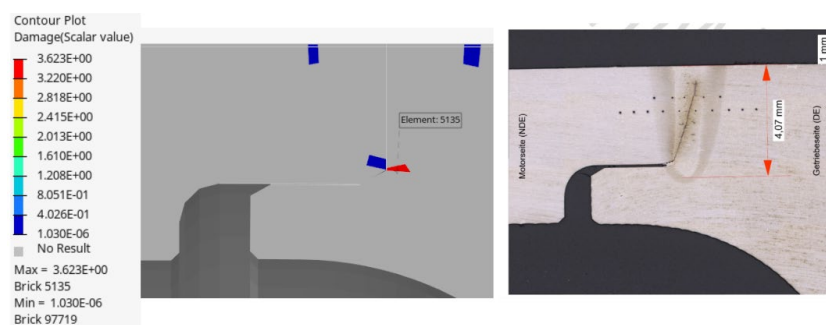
Failure due to crack propagation in shaft welding region
